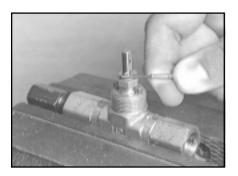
Removing the Retainer Ring from the Vent Valve
